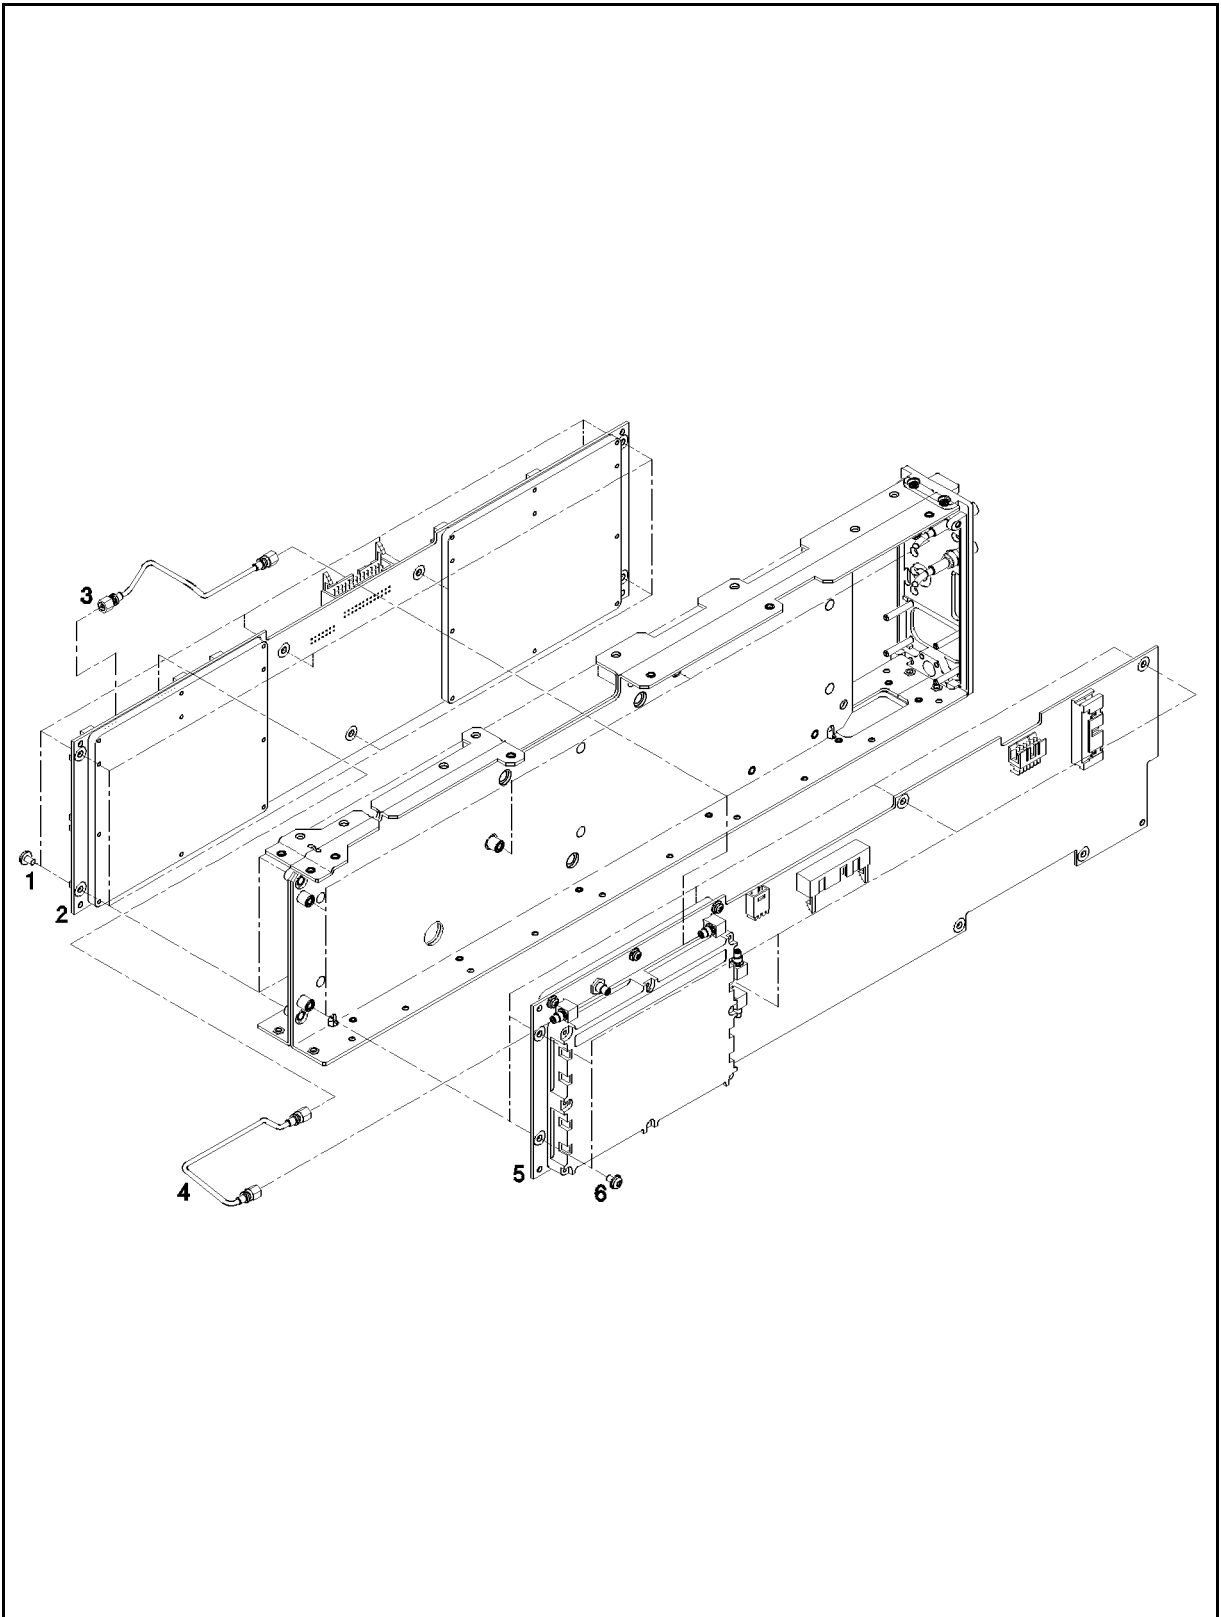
Major Printed Circuit Assemblies Illustrated Parts Breakdown
